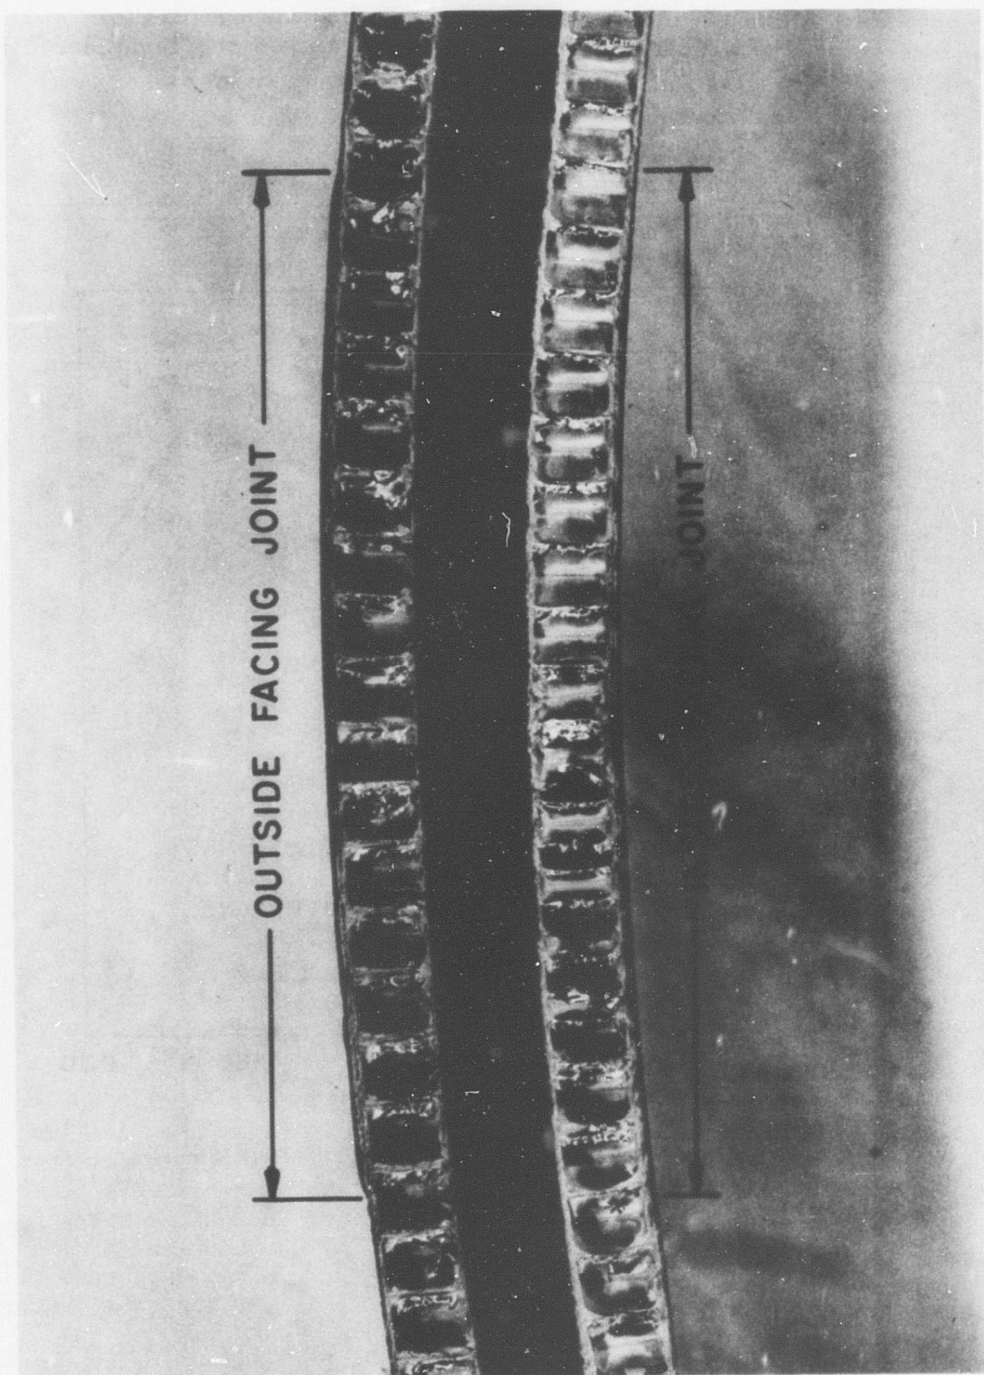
Cross-Sectional Pieces of Cylindrical Sandwich Showing Laminated Facing Joints.
